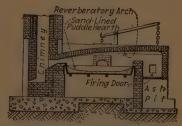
Longitudinal sectional elevation of puddling furnace.
